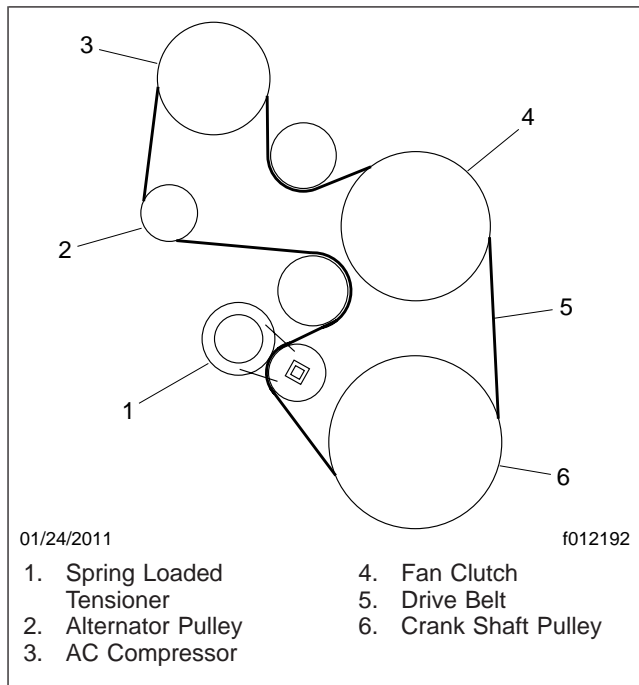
, Cummins ISC/ISL Drive Belt Routing
